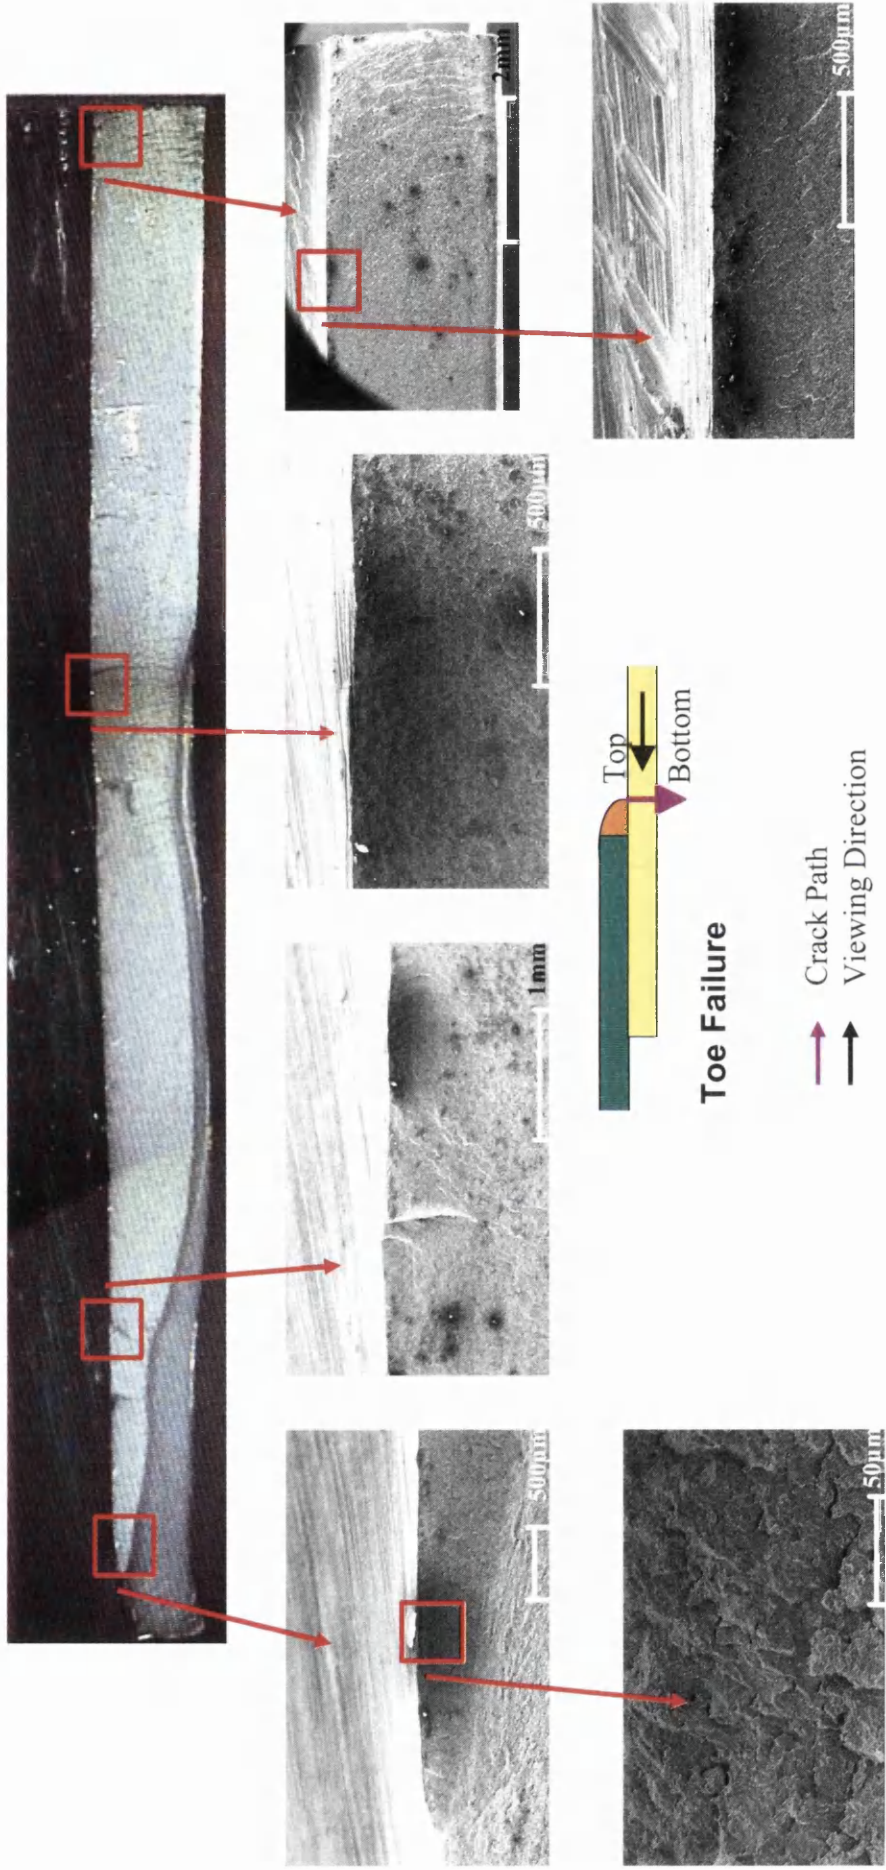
Typical Fracture Surface for GM11B Weld Toe Failure – Weld View
